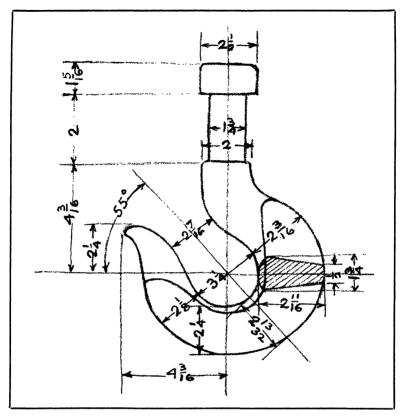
Sketch of a Crane Hook. Note How Cross-section is Used to Show Shape of Hook on Horizontal Center-line
